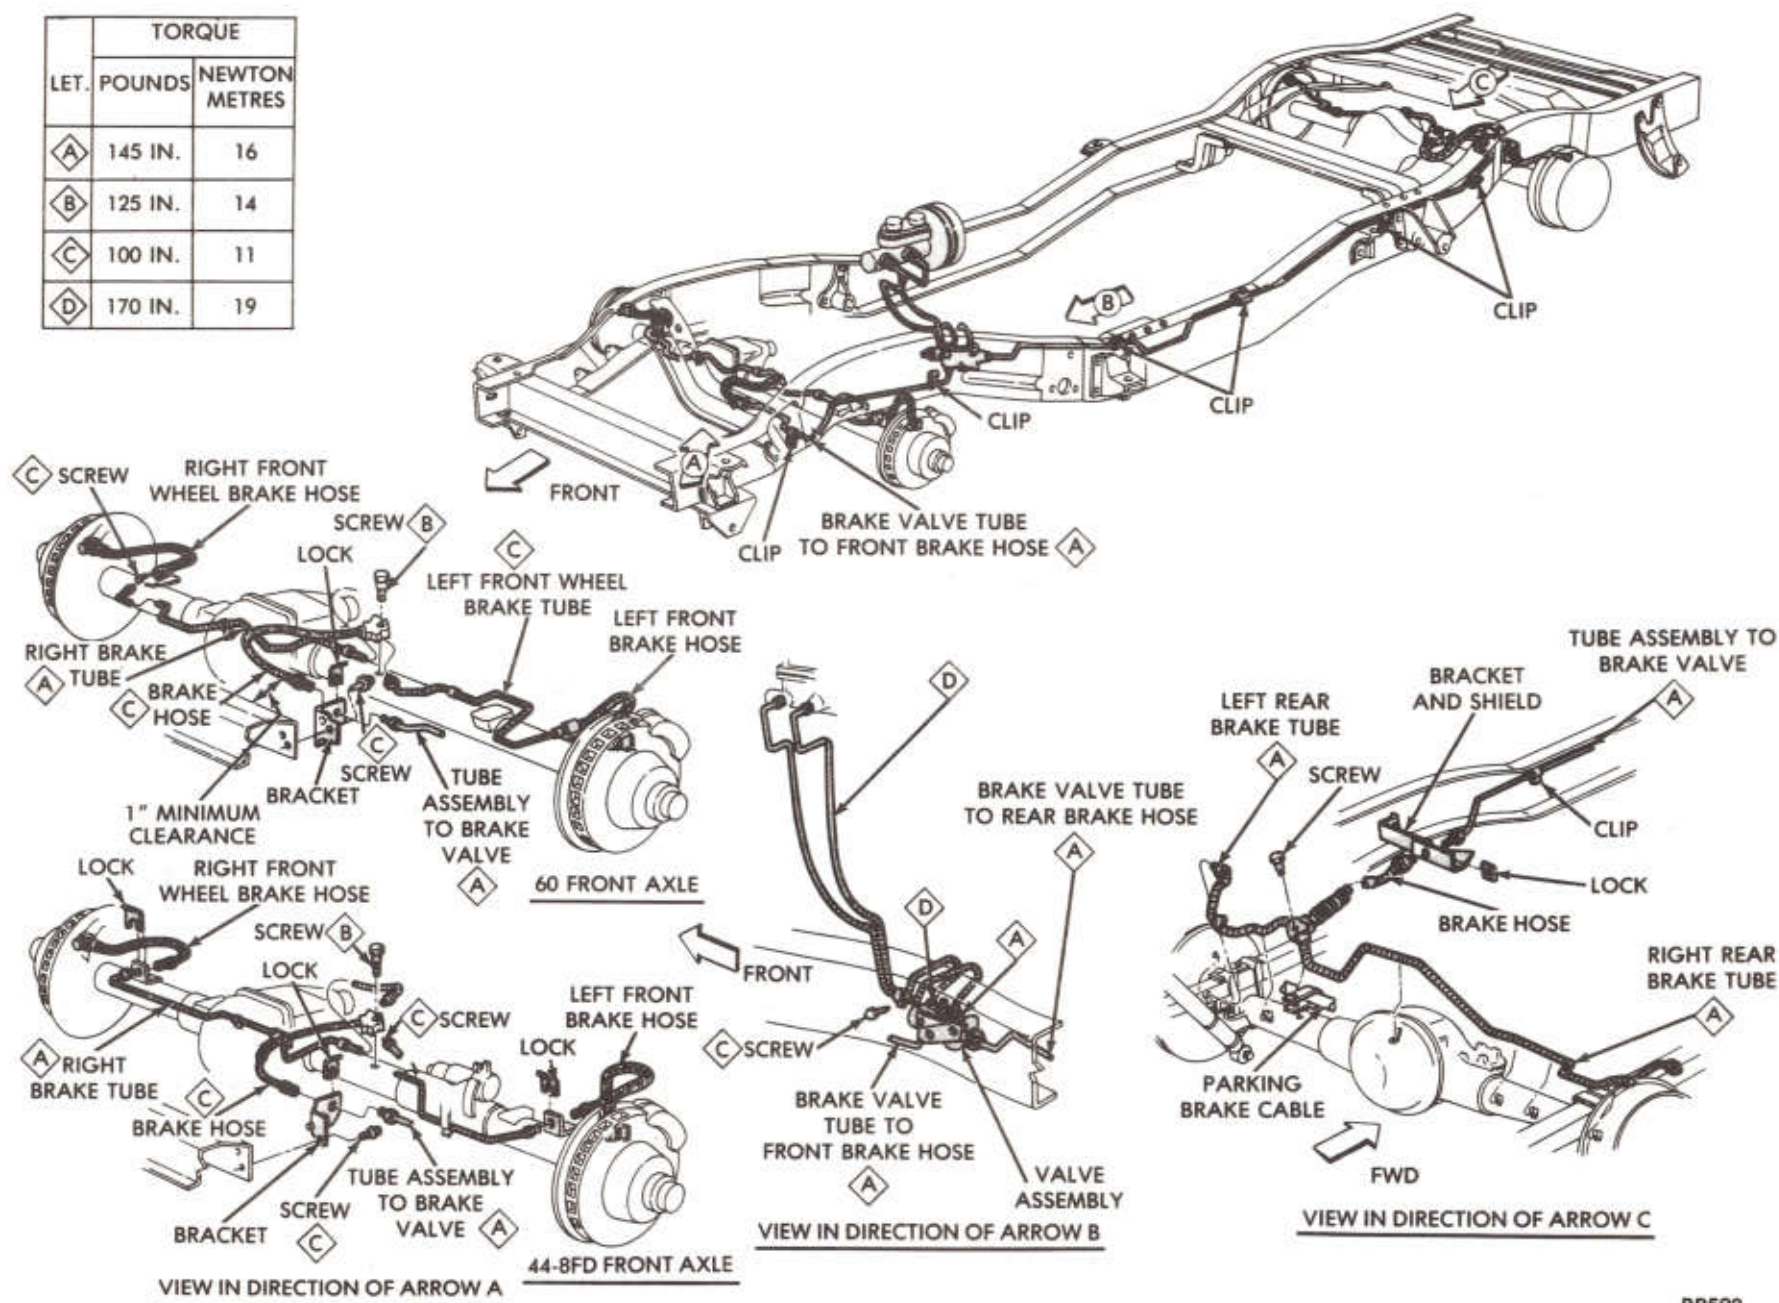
Brake Hose and Tube Routing AW150, W150, 250, 350 (Four-Wheel-Drive)
